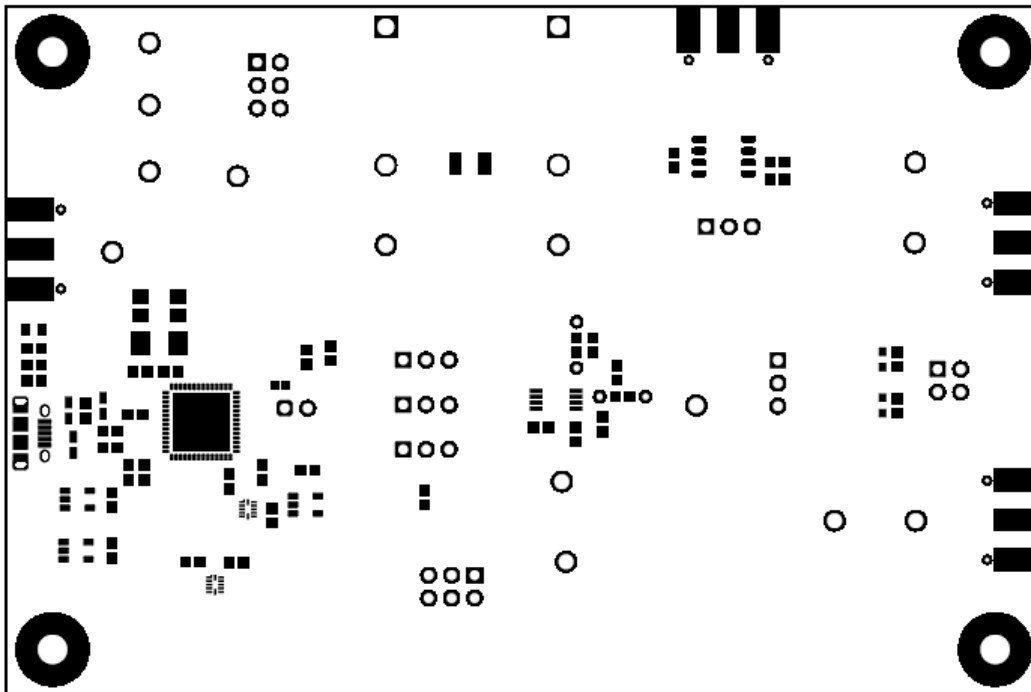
DAC8N-DGK-EVM PCB Top Layer Layout
